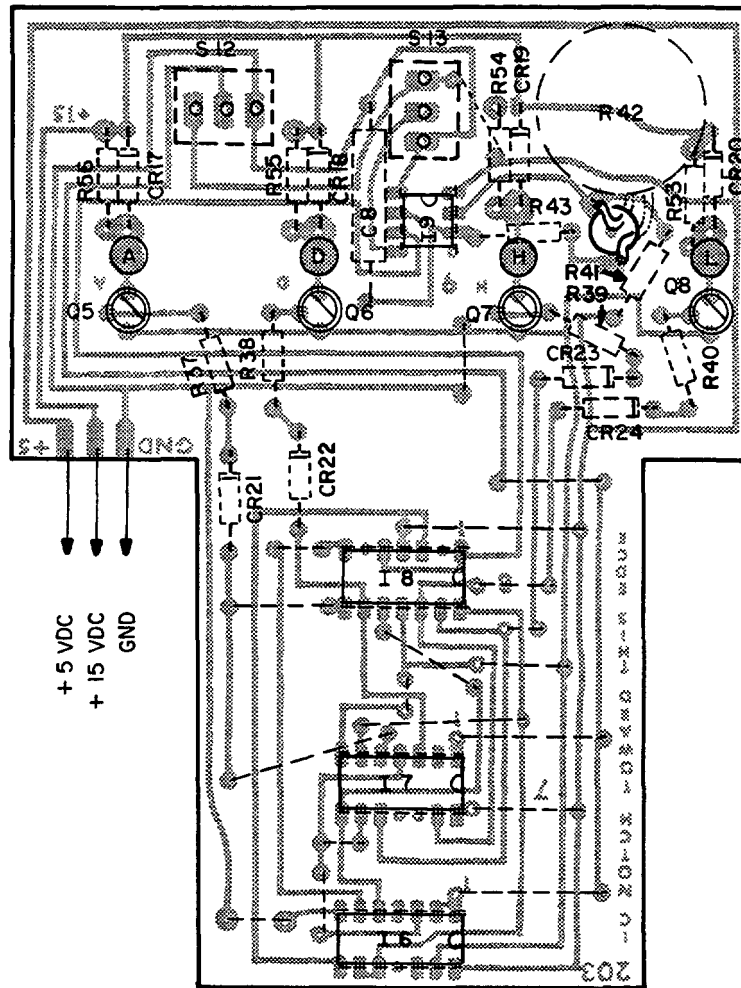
P.C. BOARD ASSEMBLY, BOARD 203, DRAWING
